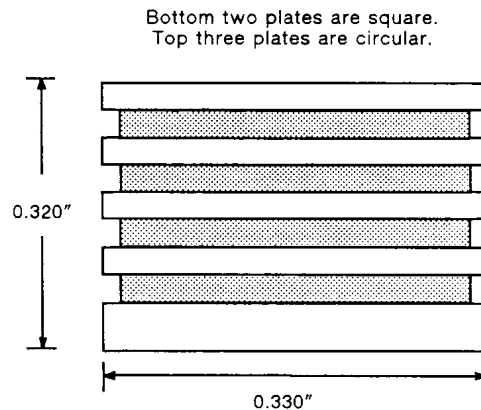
Aluminum Circular Fin Heat Sink for 64 QFP Package (Motorola H00809A001)
